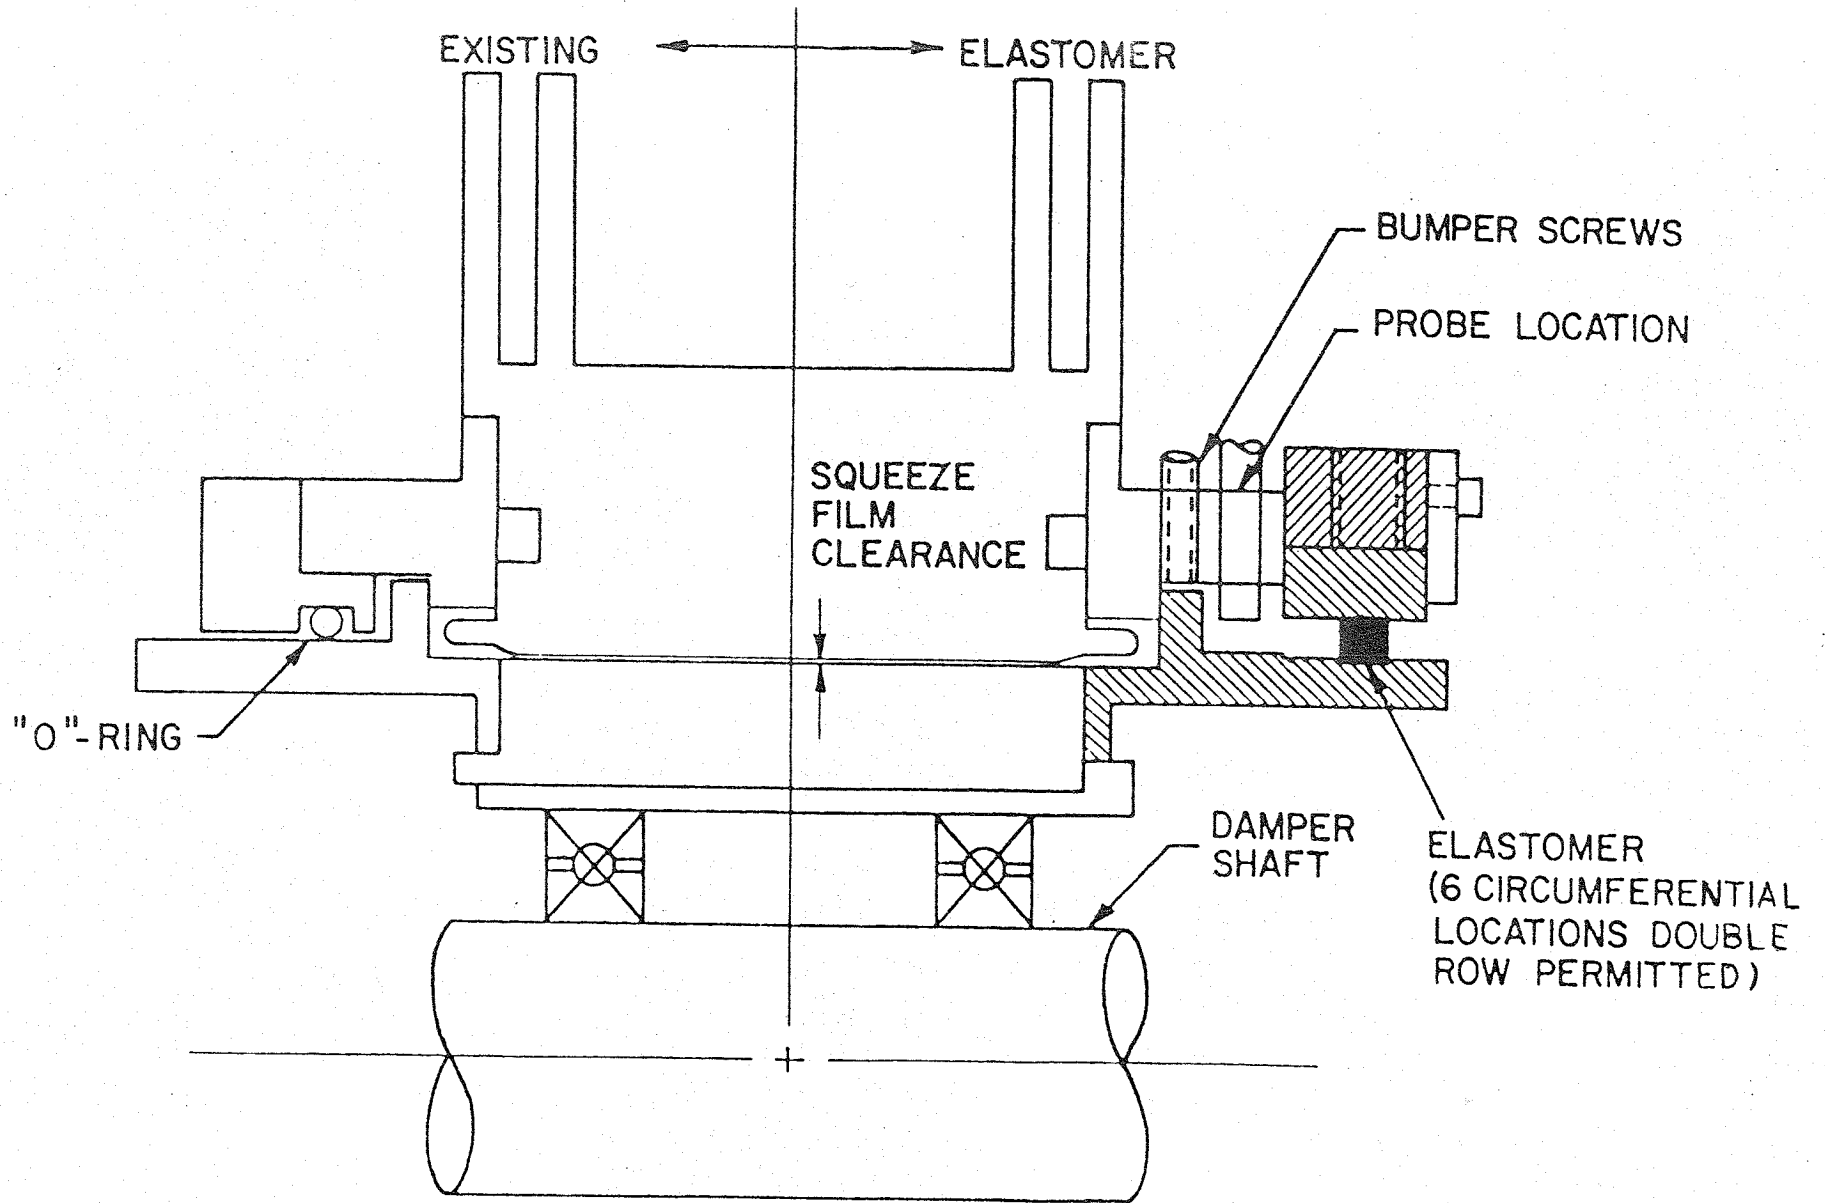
Elastomer Damper/Squeeze-Film Damper Schematic
